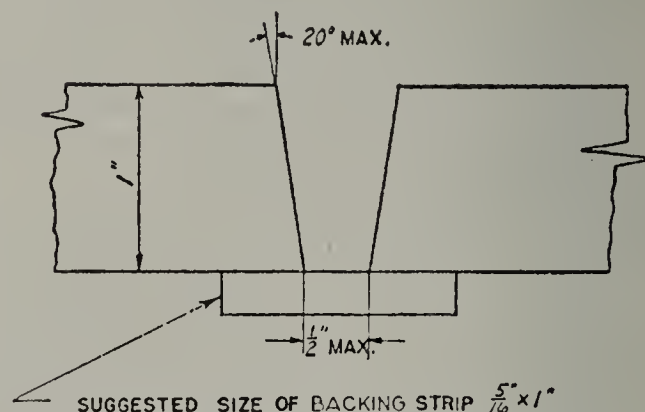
(a)—Butt Joint for Plate 1 In. Thick.
